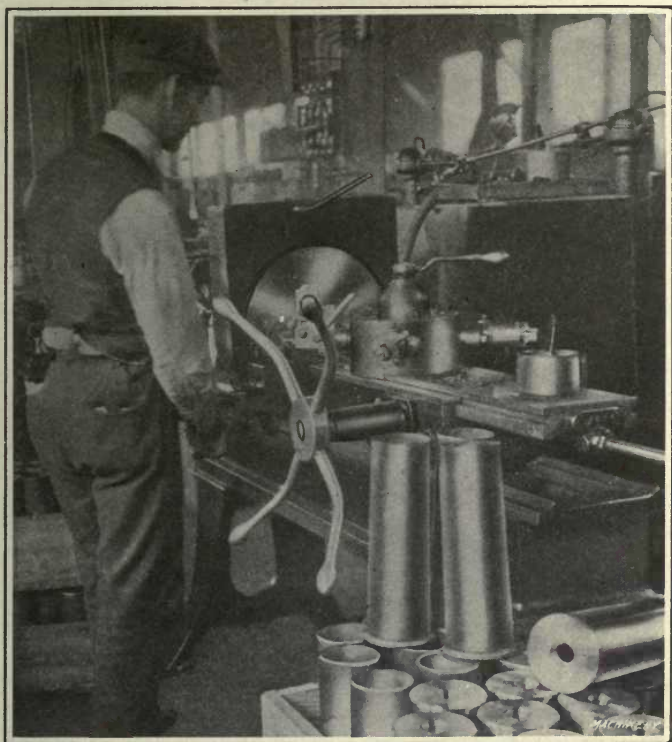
Machining Head and Mouth Ends of Case on a Bullard Cartridge Case Trimming, Facing and Chamfering Machine
